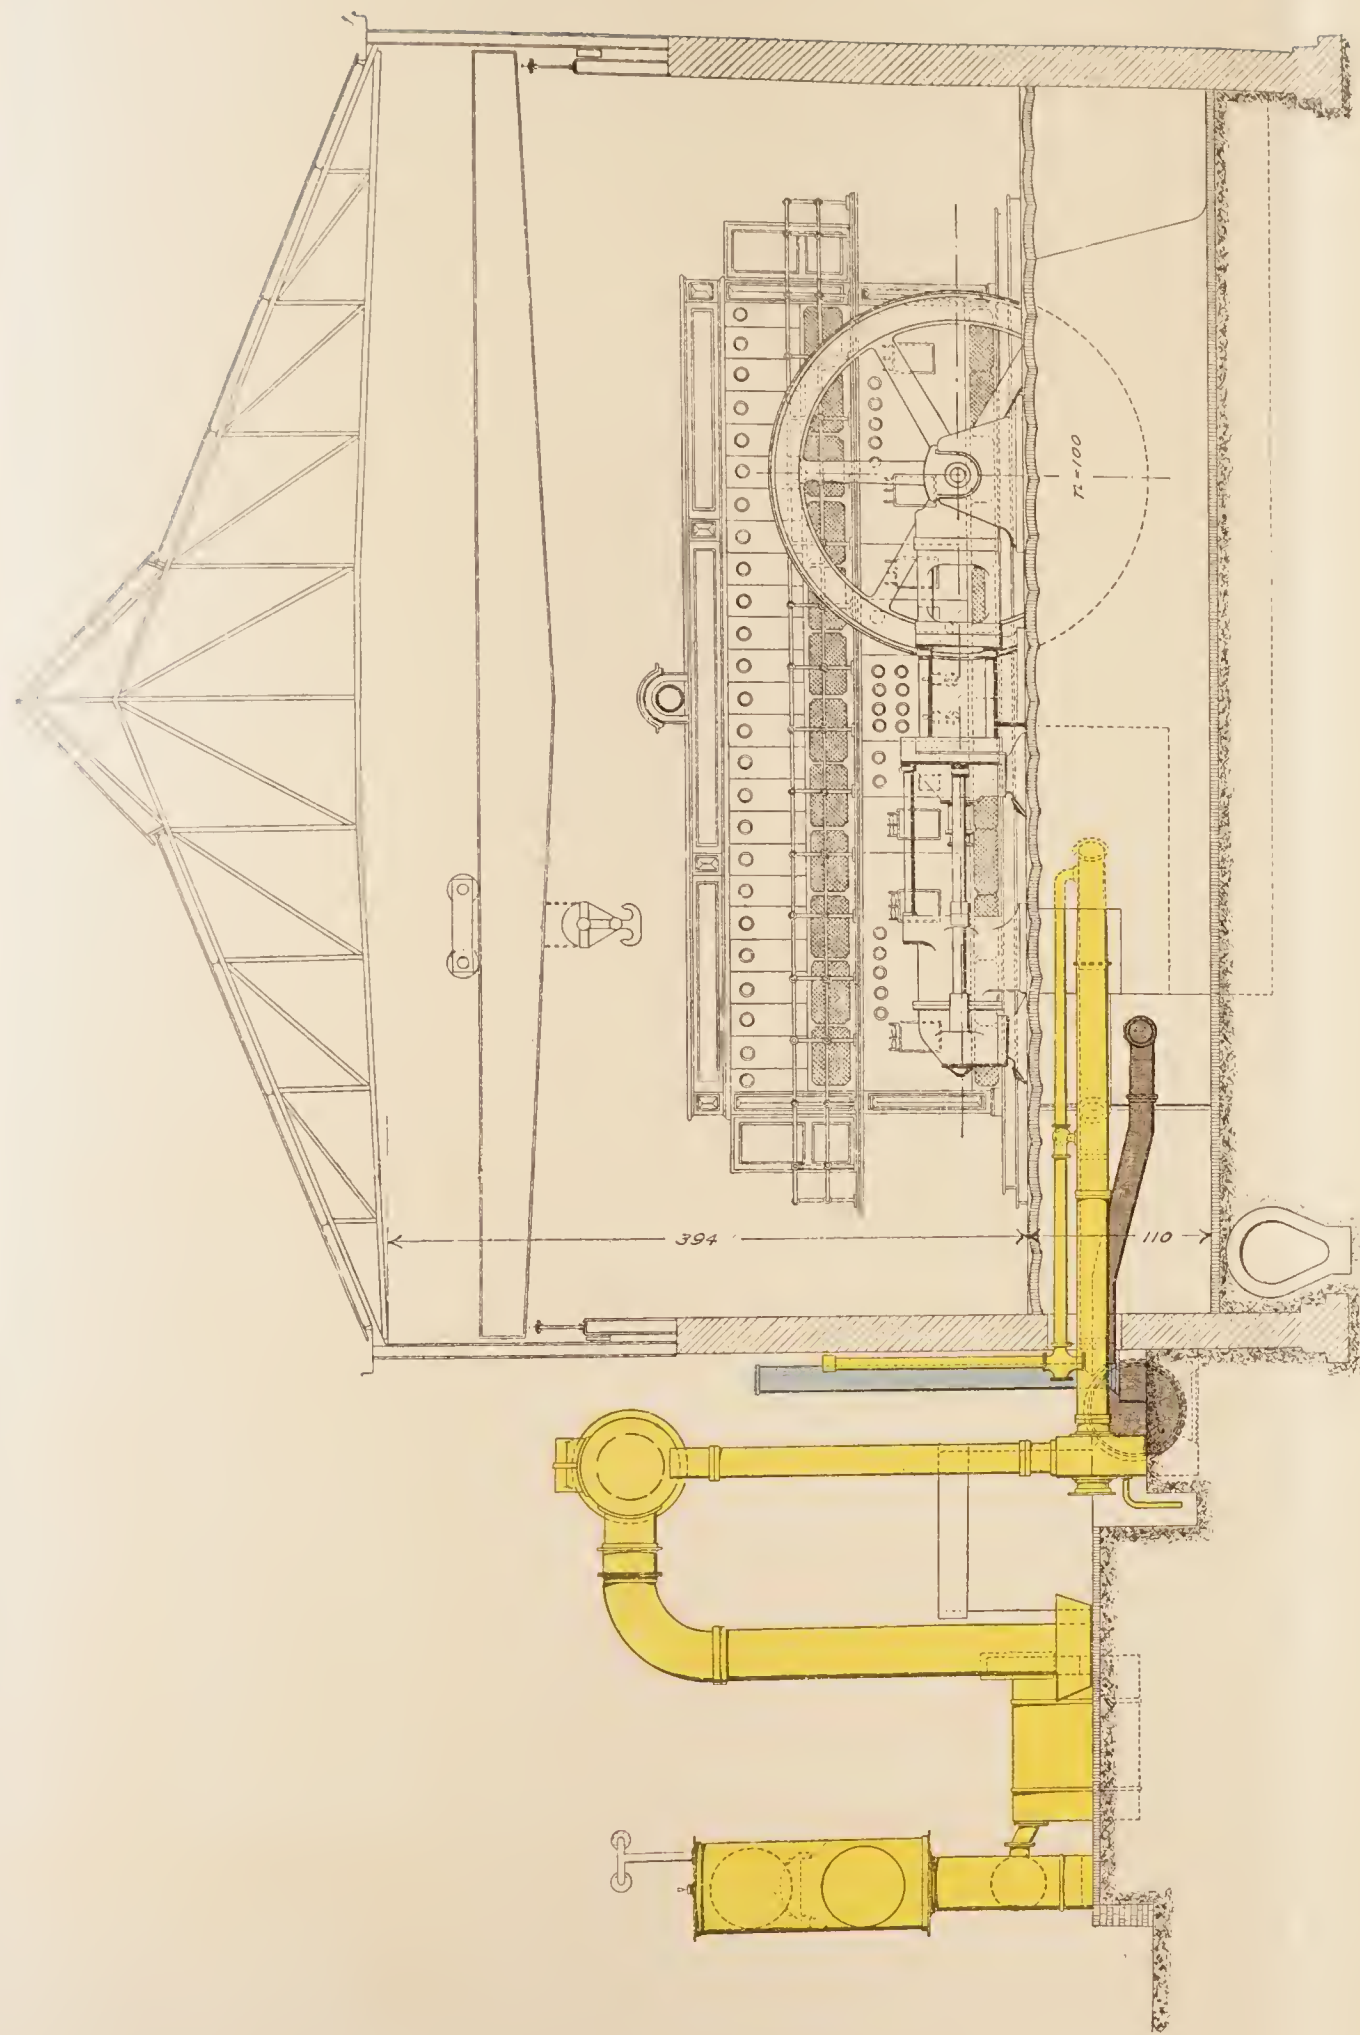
End View, Cockerill Engine. (Belongs to Plate XXIX.)
